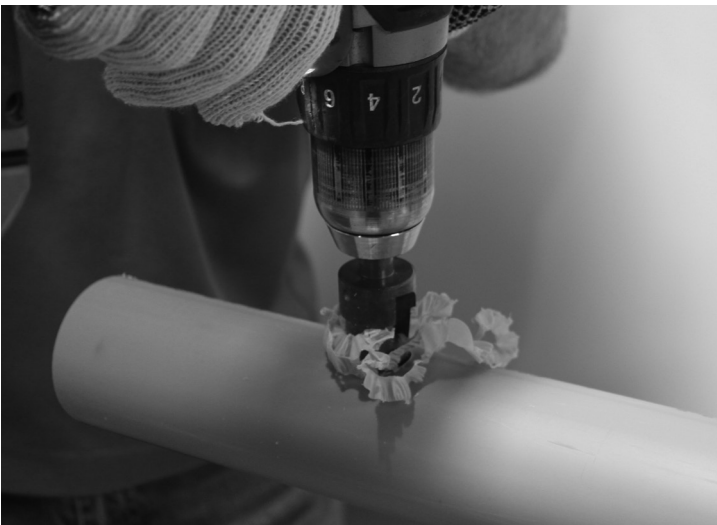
To drill through the pipe wall, an electric drill and correctly sized drill big, supplied by Asahi/America, are required.
